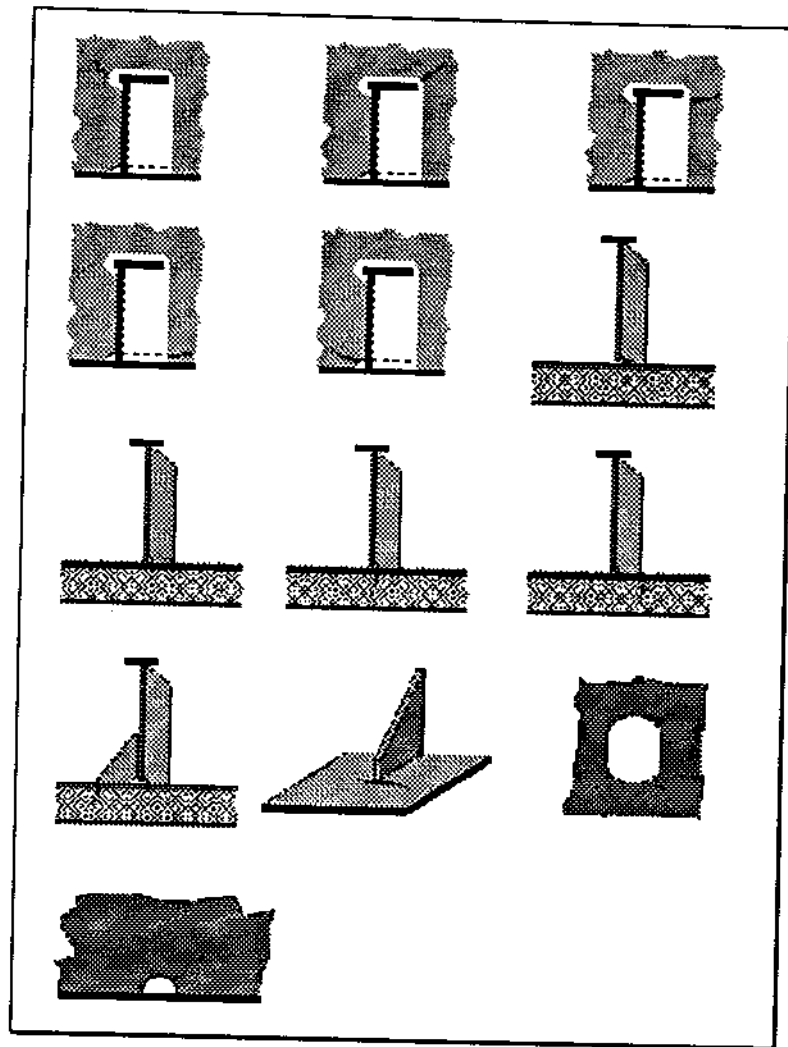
There are 13 types of pre-defined cracked structural details.
